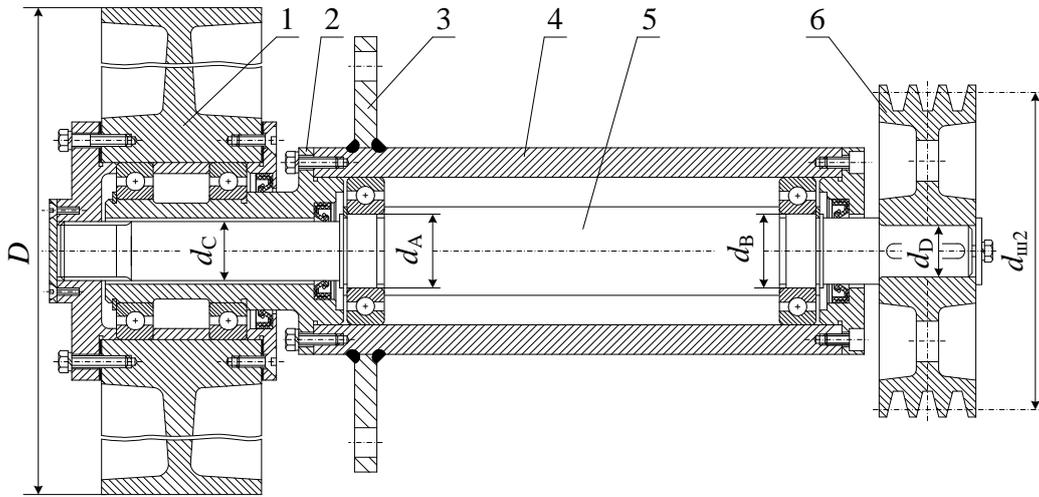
Construction of the main band saw shaft submitted to bending by the tension force of the belts and to twisting
